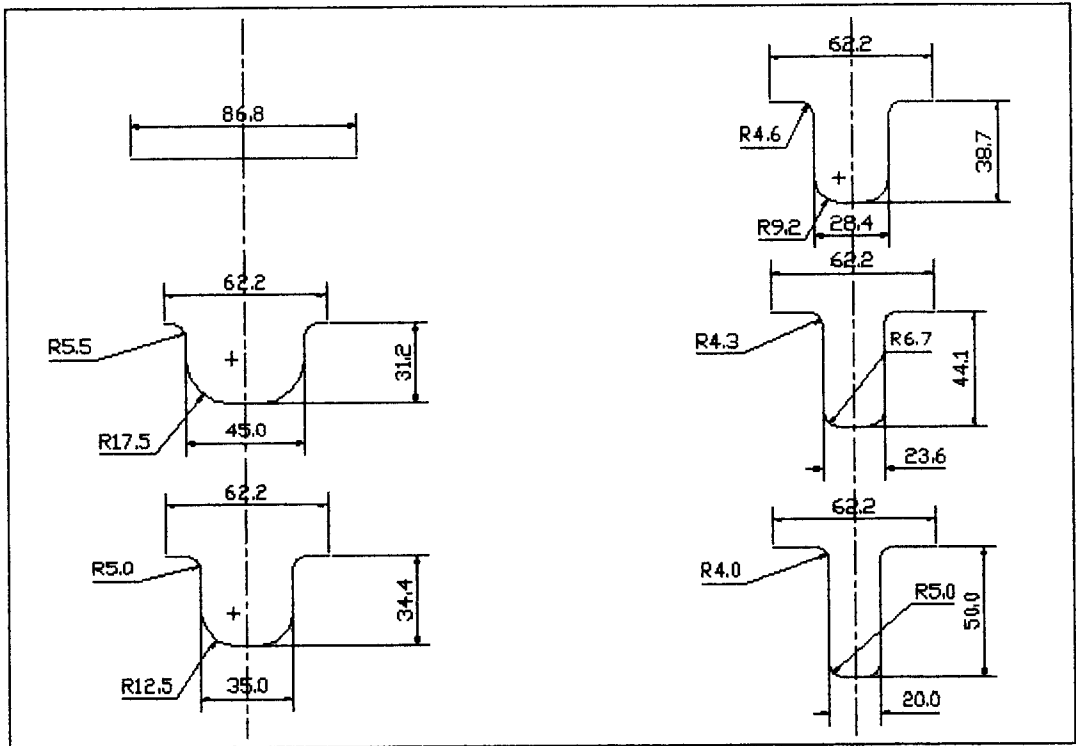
Details of Each Drawing Step ($T = 1 \text{ mm}$)
